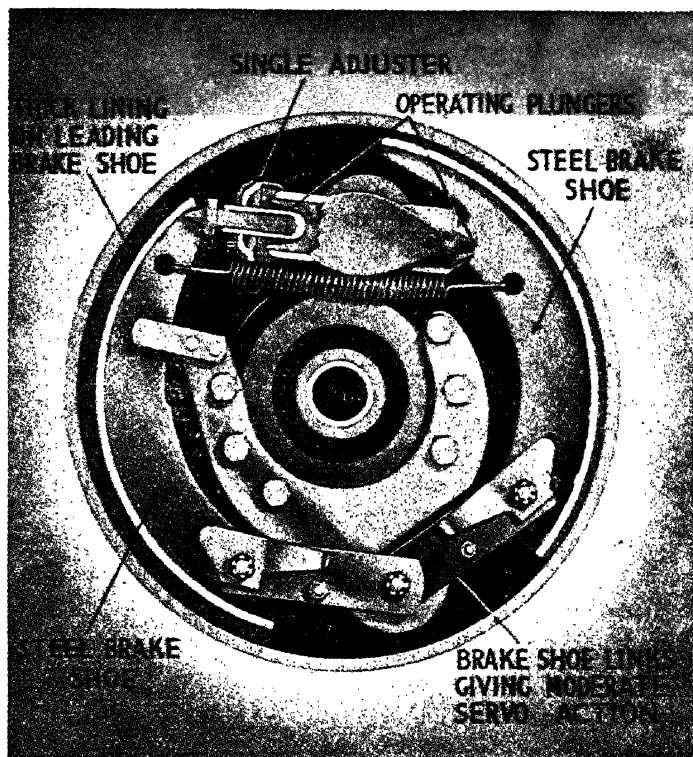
Single Adjuster Type Hydraulic Brake.
